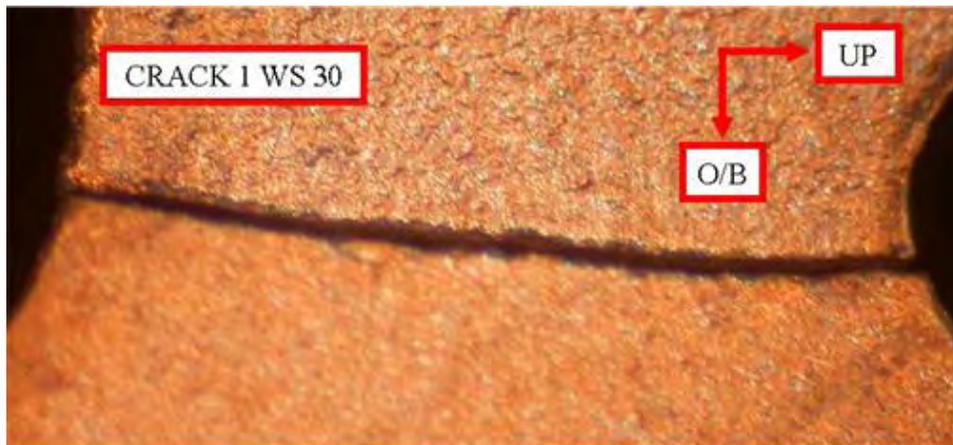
Location of Cracks on Left Wing Bulkhead Wing Fillet WS 30 FS 191.7
